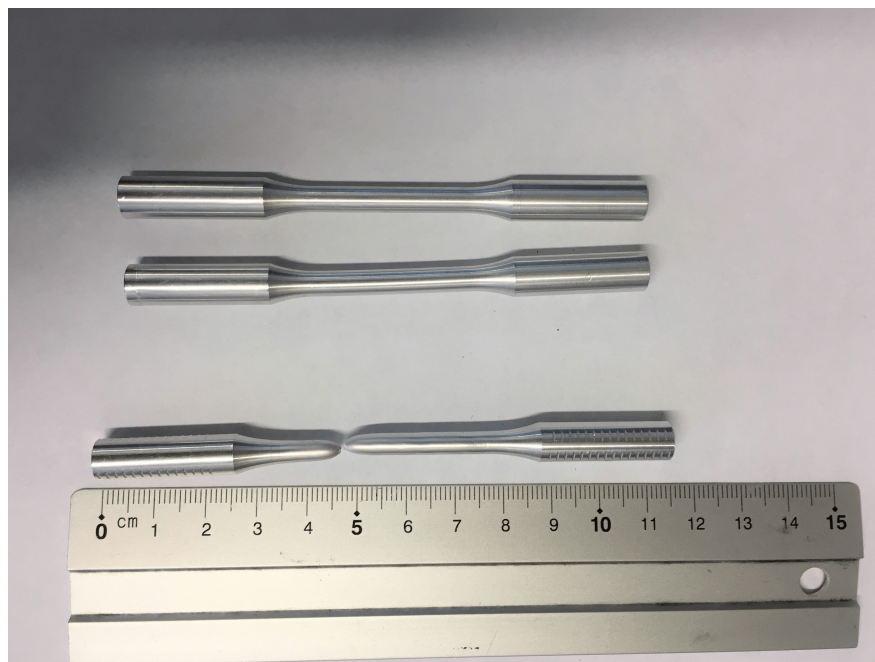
Picture of tensile rods for tensile testing of 10mm screw extruded aluminium foil.
